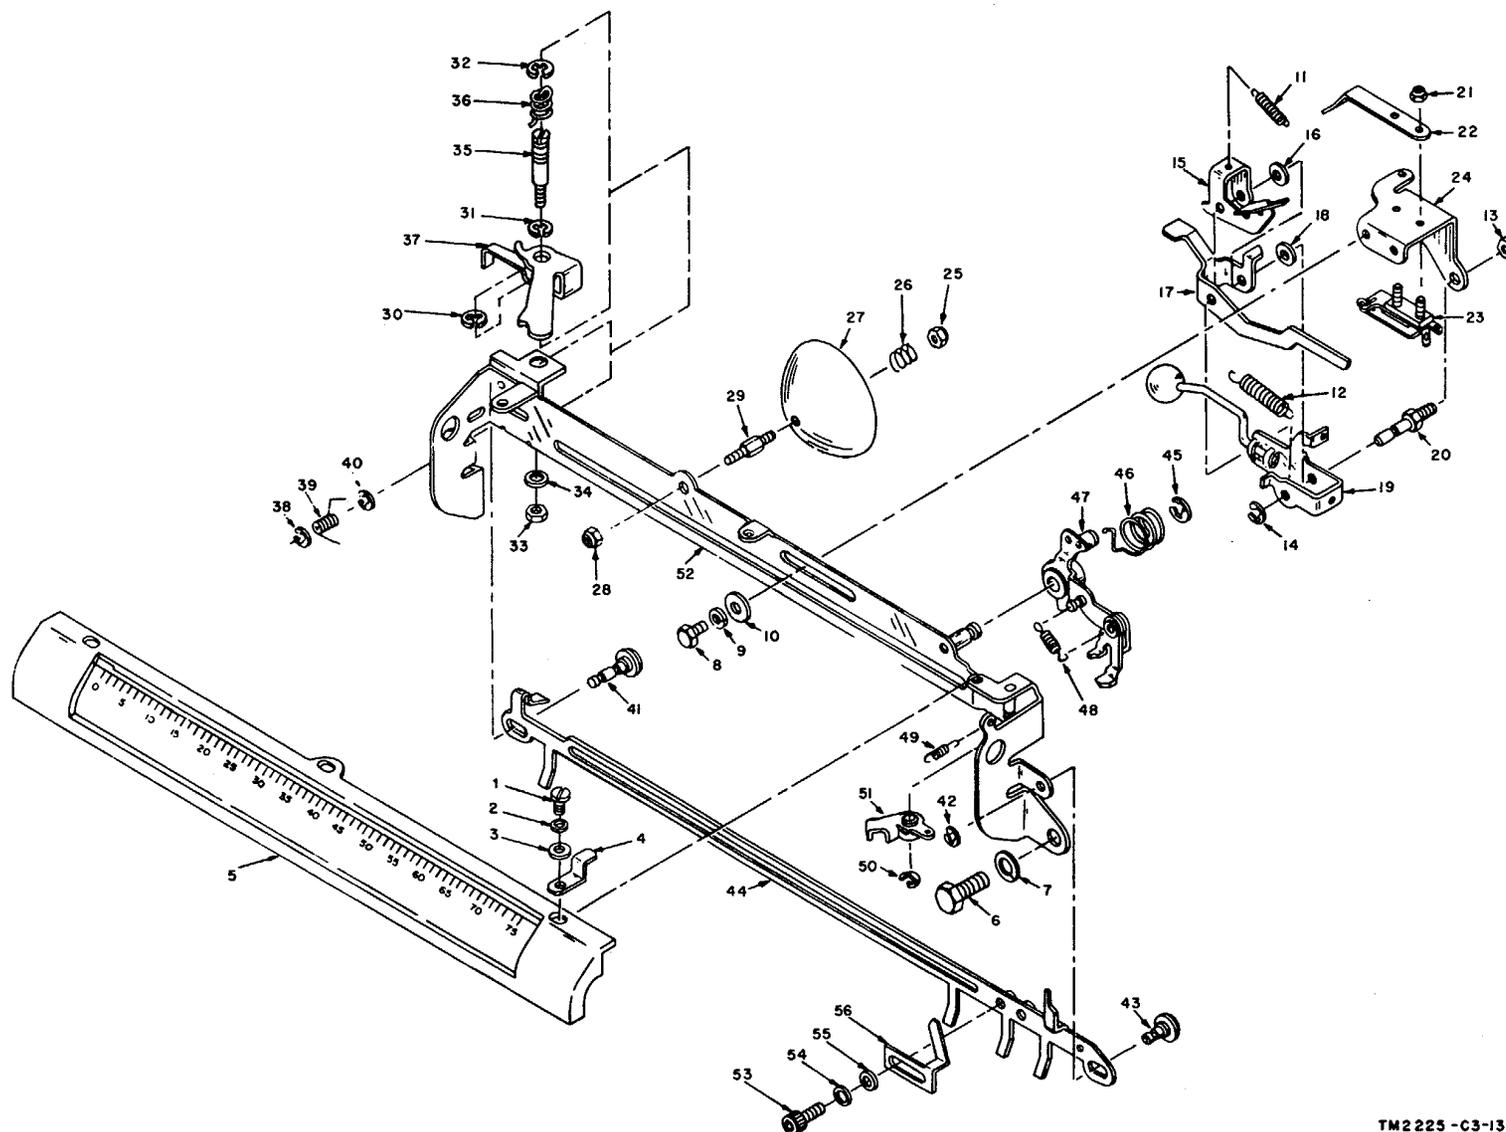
Indicator frame assembly, exploded view (TT-76B/GGC serial numbers 255 and below, Order No. 13931-PC-58).
